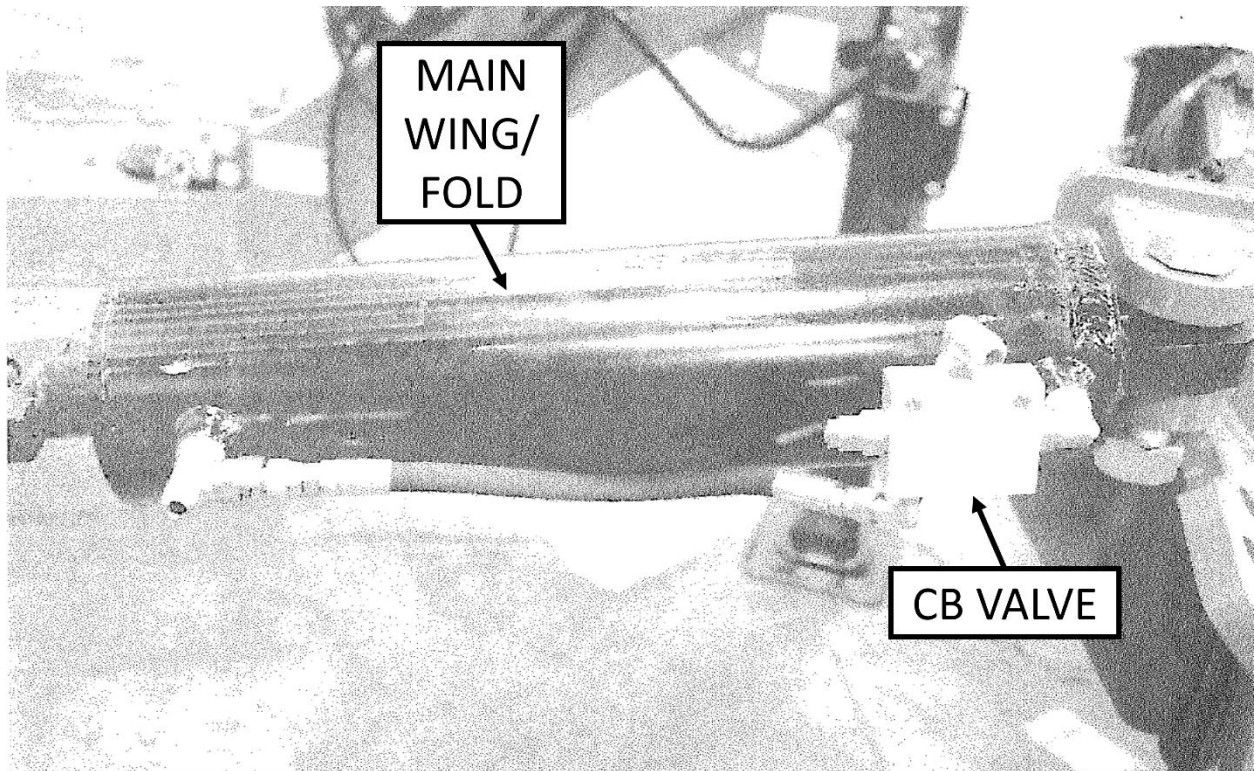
Main Wing or Main Wing Fold cylinder with Counterbalance Valve
